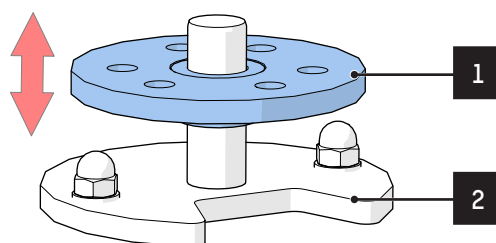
Fitting the lower flange of the TRS moving barrier
